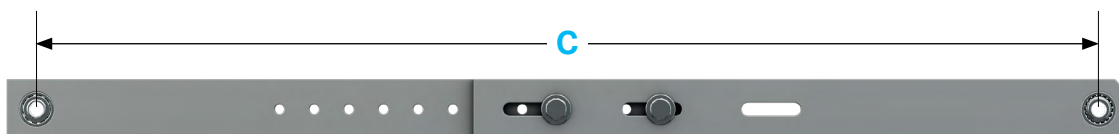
"C" is the distance between the bearings on each end of the operator link assembly.
